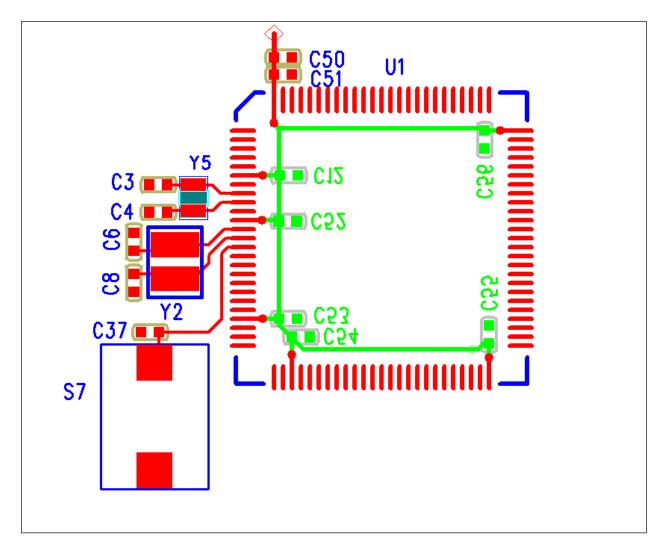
LQFP100 Package PCB LAYOUT reference diagram
